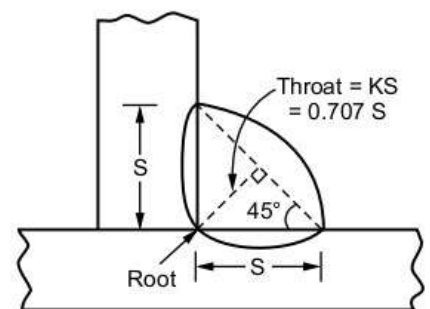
Typical cross - sectional dimensions of a fillet weld
